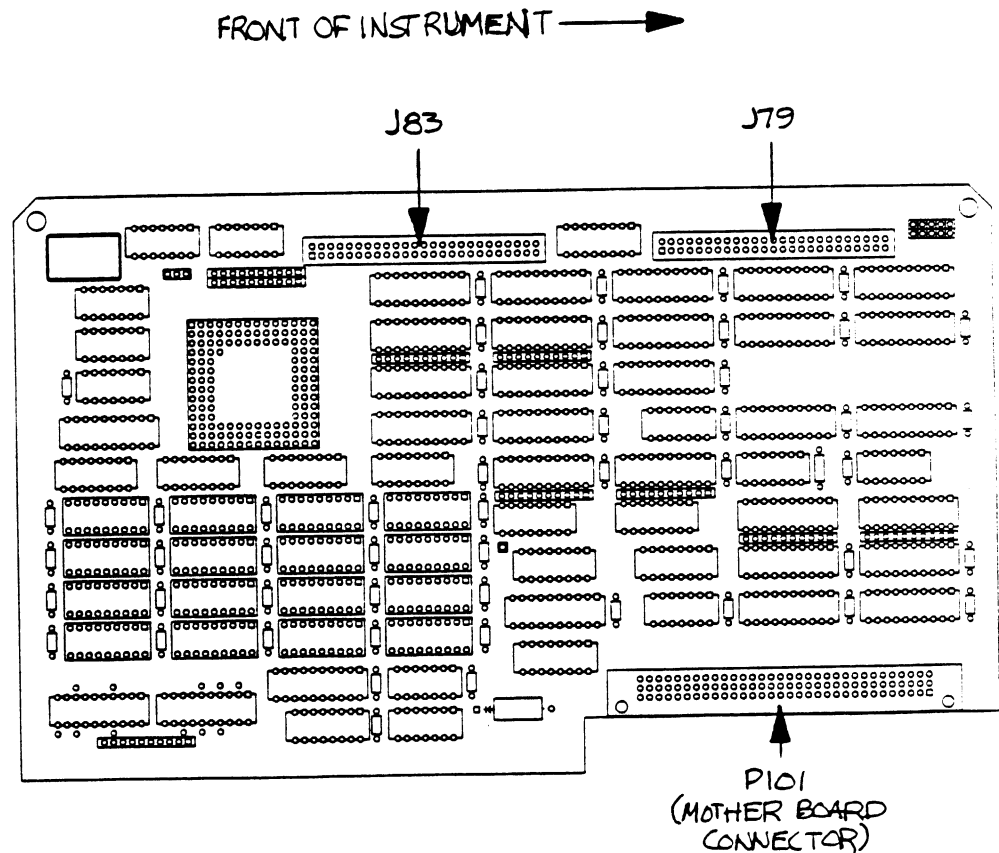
Connector locations for removal of the A15 Memory Manager Unit Board.
